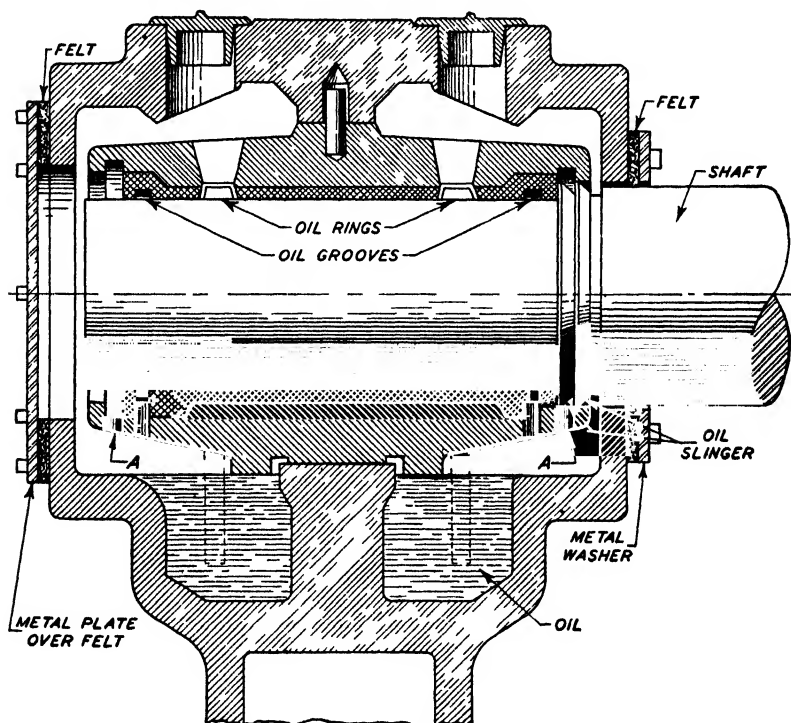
Proper Method of Making a Bearing to Prevent the Oil from Siphoning
